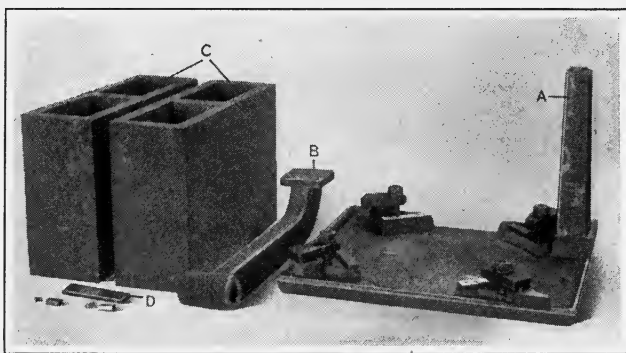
Equipment provided to adapt a Profiling Machine for a Milling Operation on the Case
